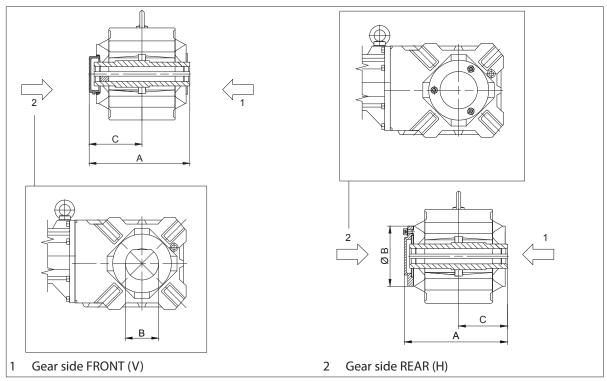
SSV cover for bevel gearbox BK10 ... BK90 - sealing caps (left), sealing cover (right)
